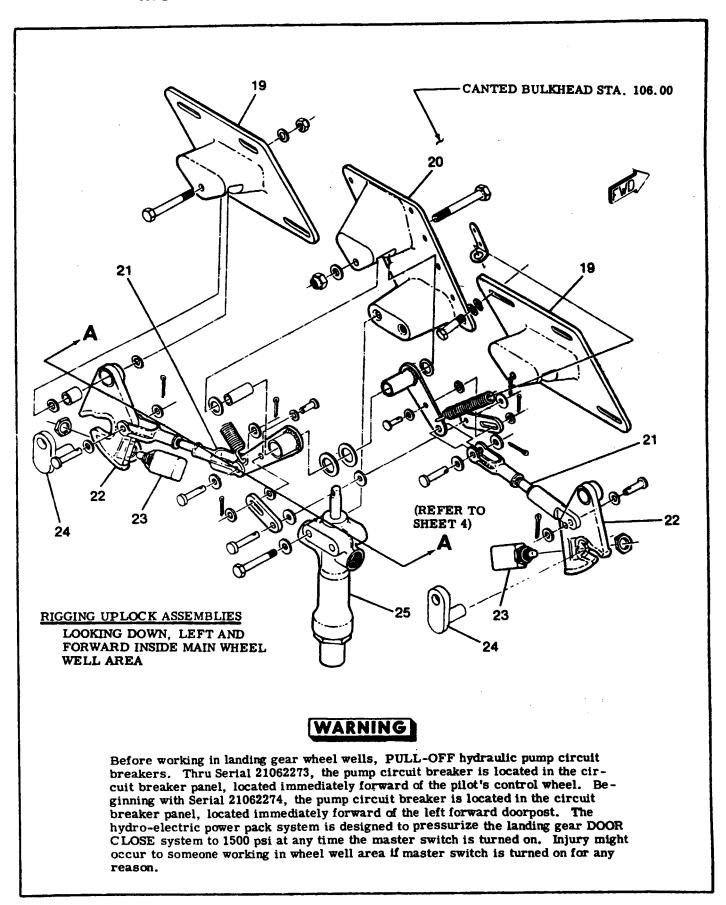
Rigging Main Landing Gear (Sheet 3 of 4)
